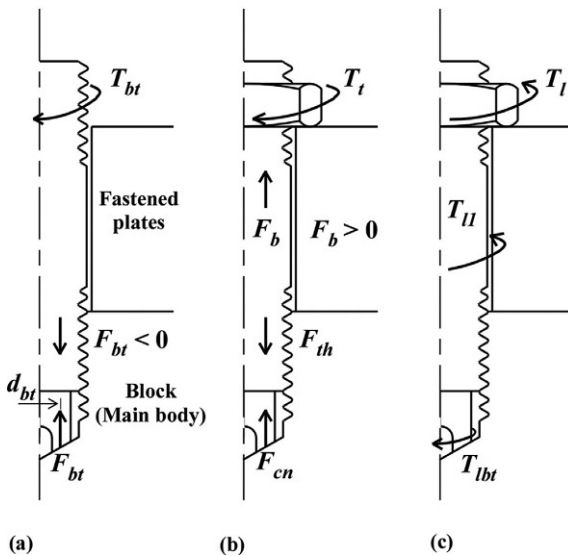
Assembly and disassembly processes of bottoming stud. (A) Bottoming process, (B) tightening process, and (C) disassembly process.
